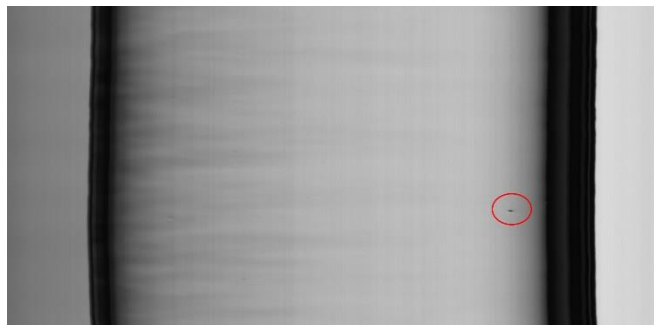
Example of a blob defect in a glass tube (highlighted by a red oval).
